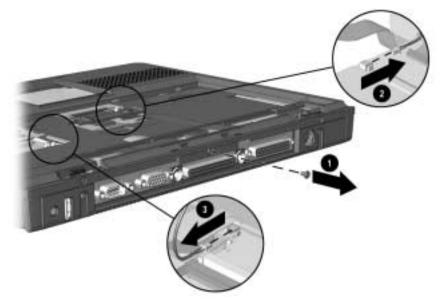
Removing the Top Cover Rear Panel Screw and Disconnecting the Speaker Cables
